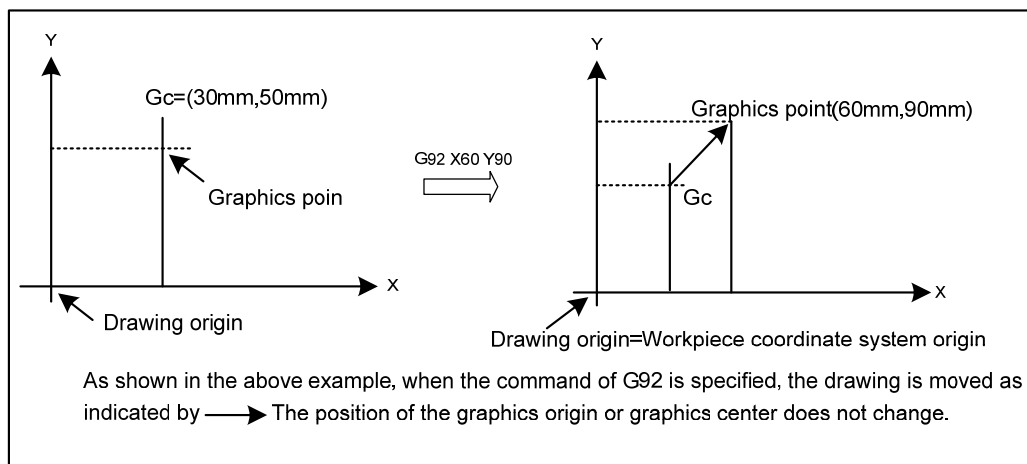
(c) Workpiece coordinates origin and graphics origin
